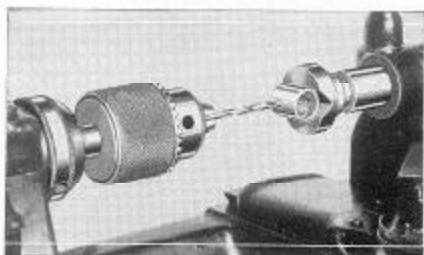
Drilling Round Work using Crotch Center in Tailstock of Lathe
